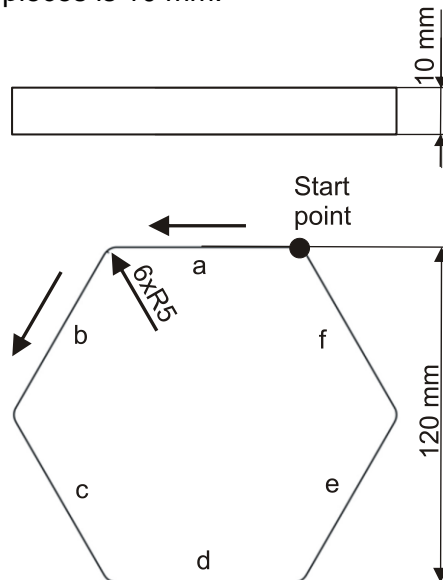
Design of cutting pieces and order of cutting for established process parameters
